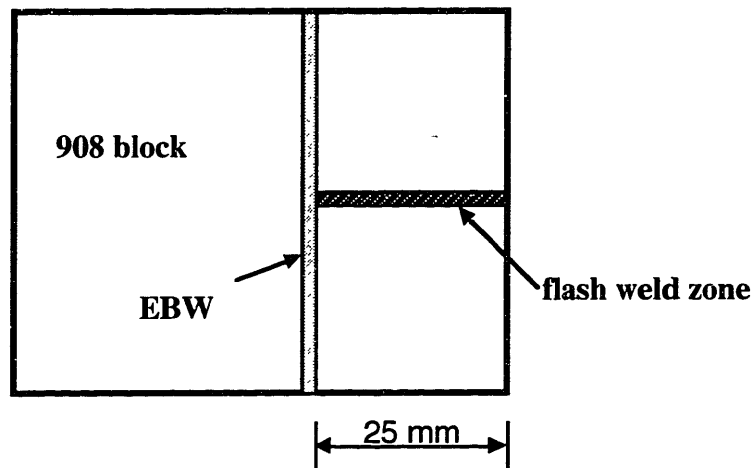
Flash weld jointed to alloy 908 block by electron beam welding.
